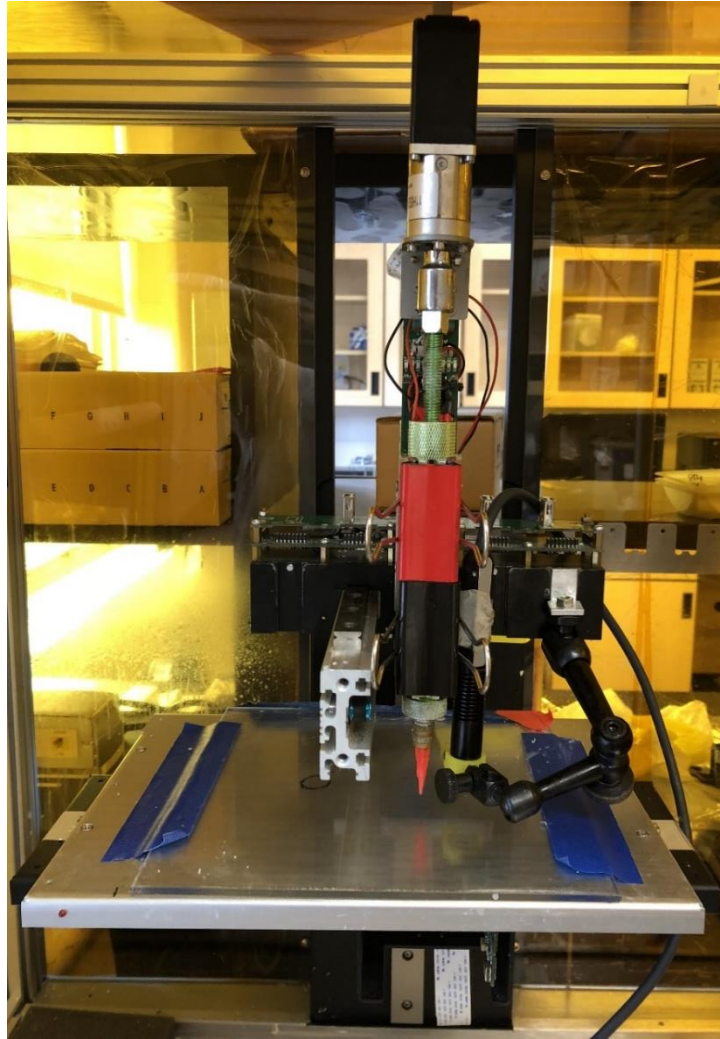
3D-printing configuration include tube and piston system with taped conical nozzle and UV light pen.
